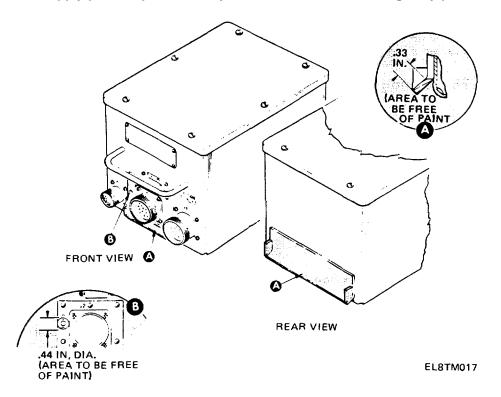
Electronics Assembly Unpainted Surfaces.
